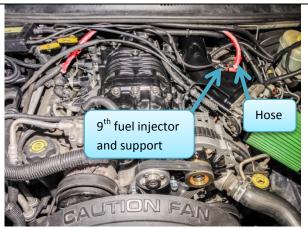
Properly installed 9th fuel injector and hose, non-EGR intake tube.
